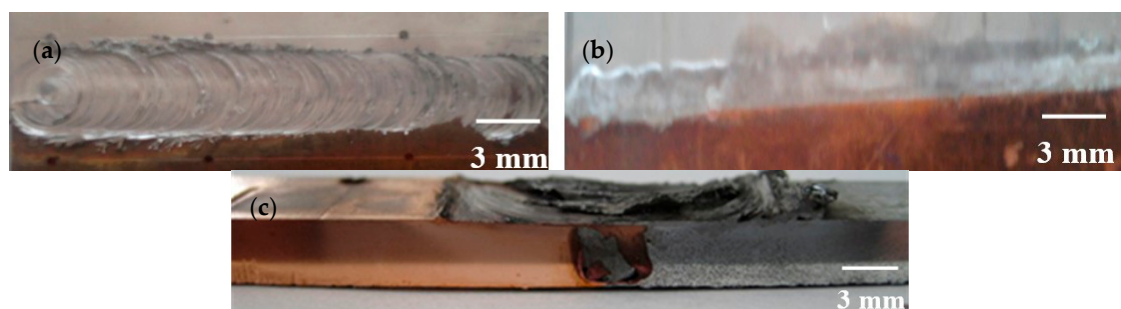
Welded part macro-images under 1330/20/1 condition (a) Upper surface; (b) Lower surface; (c) Cross section.
